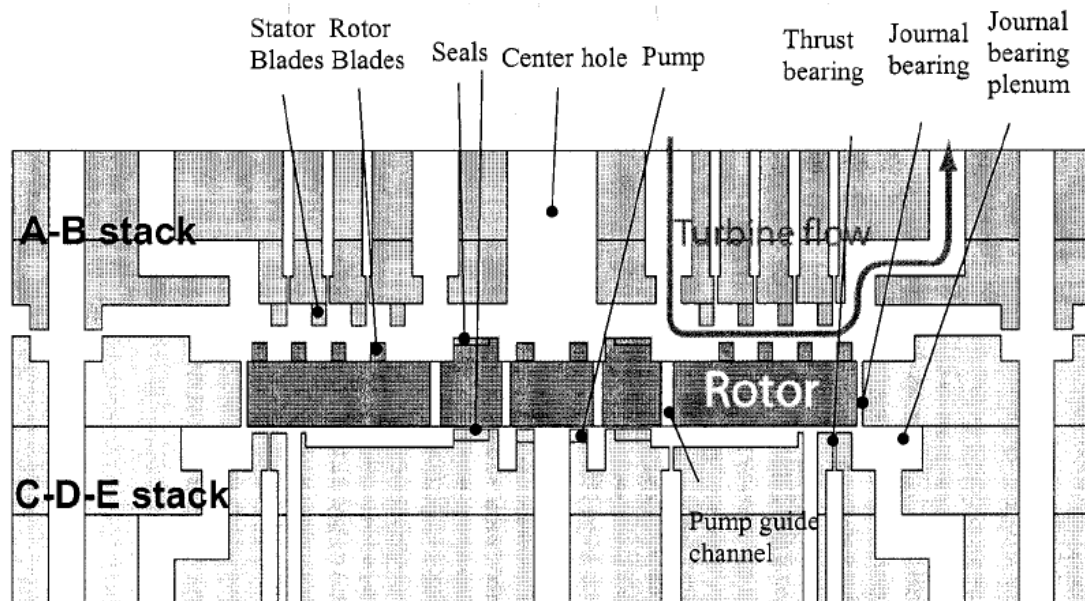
Schematic of a spiral-groove viscous turbopump supported by air bearings and driven using a multi-stage radial in-flow air turbine (Lee, 2006).
